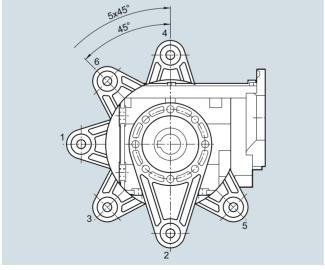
/8 Bevel gearboxes BAD., sizes 19 and 29
